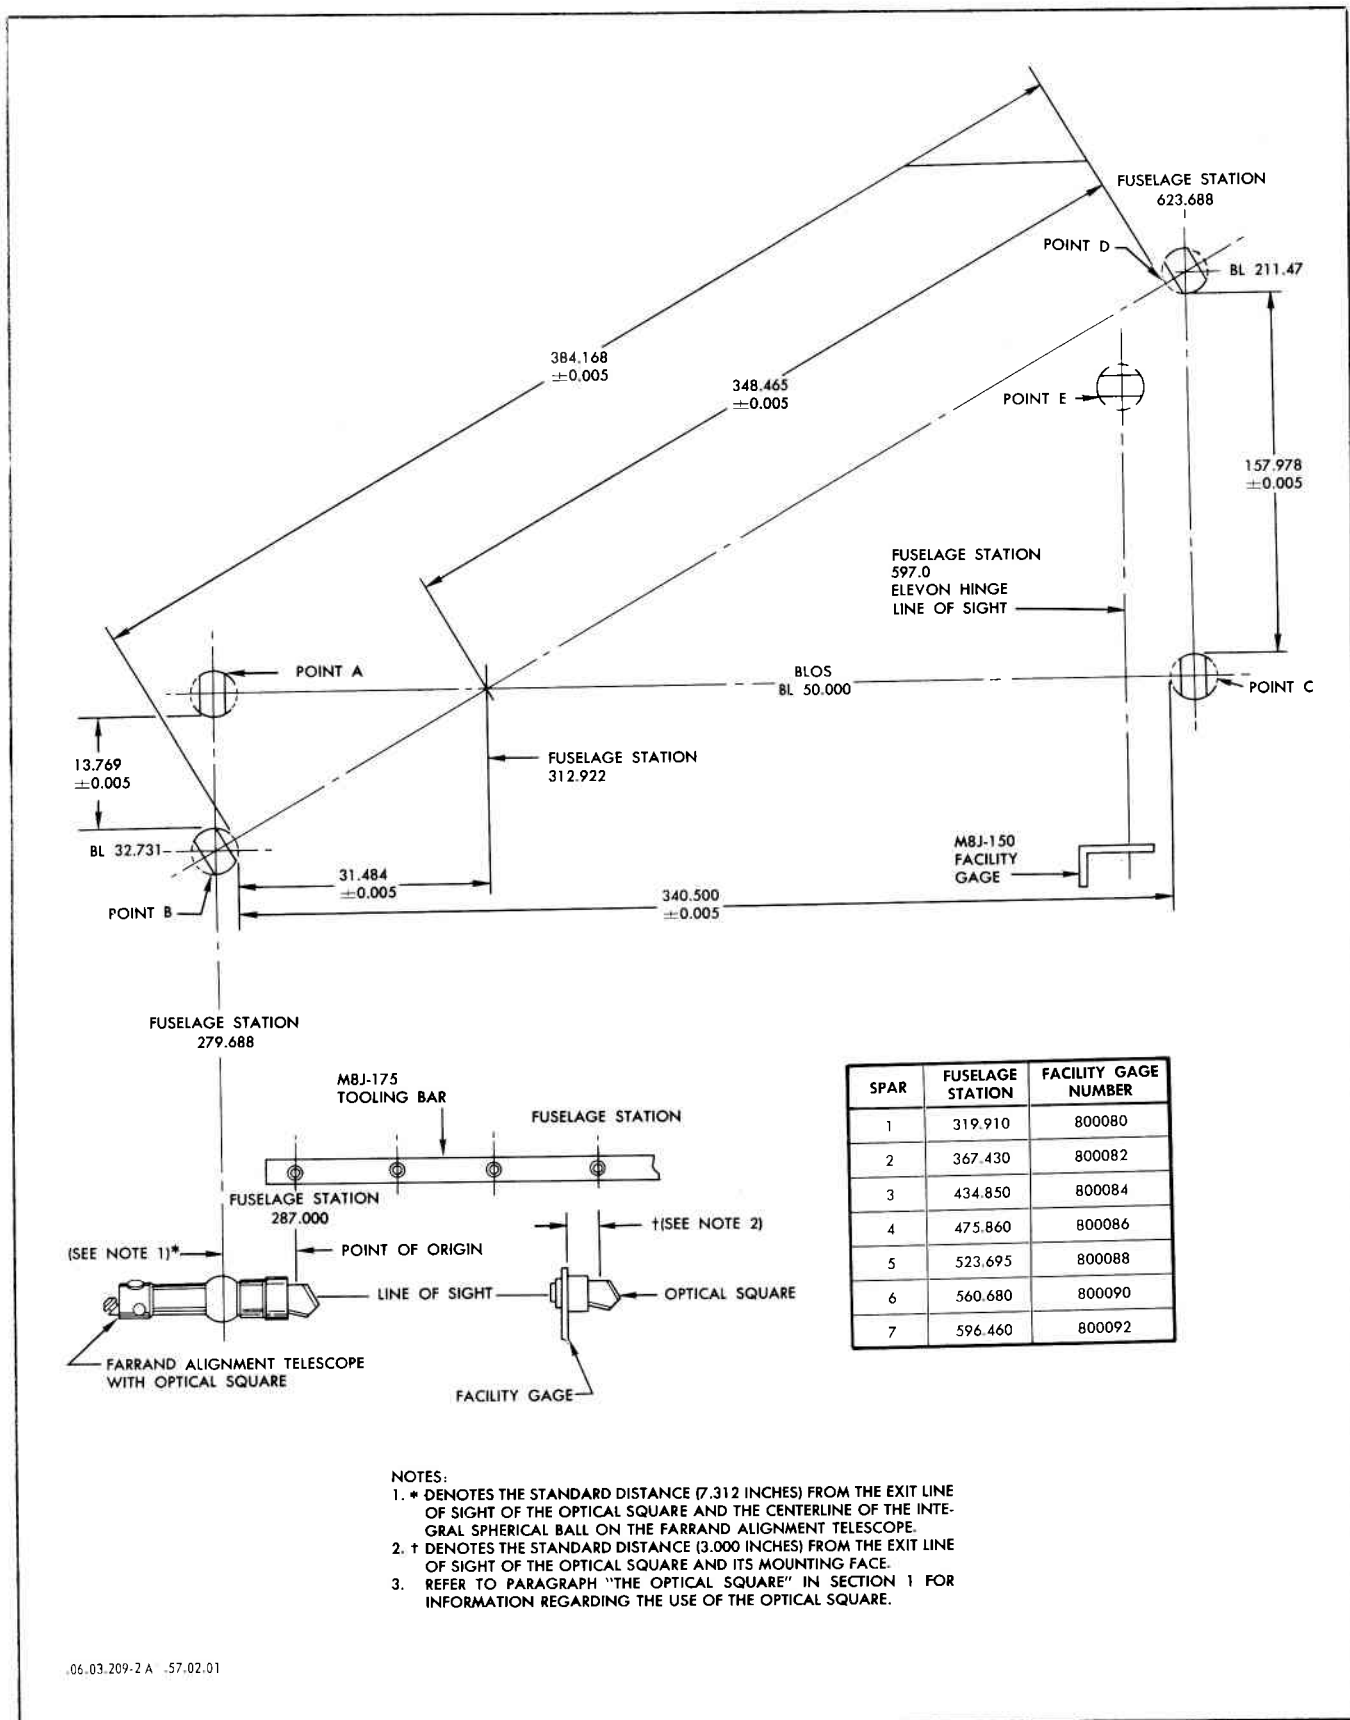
Master Tooling — Case XXIX Wing Assembly (Sheet 2 of 2)
